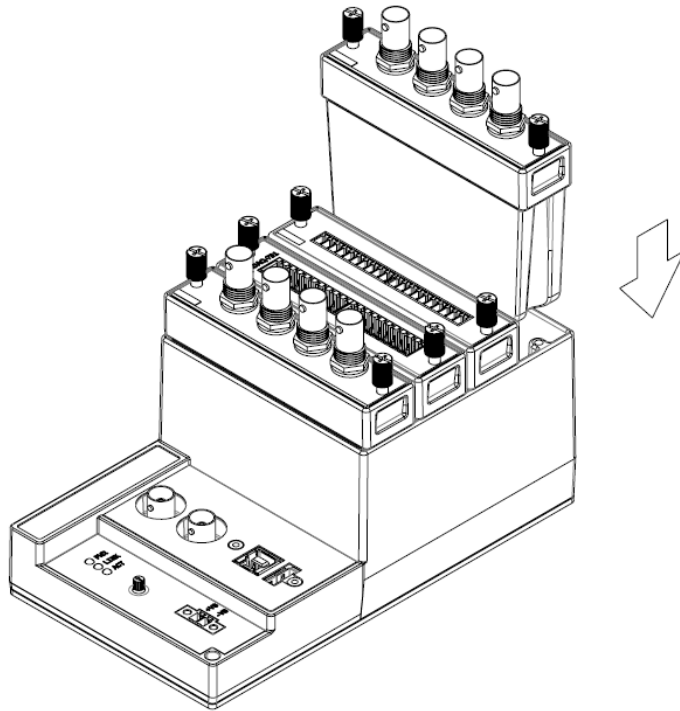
Installing iDAQ modules into the iDAQ chassis
